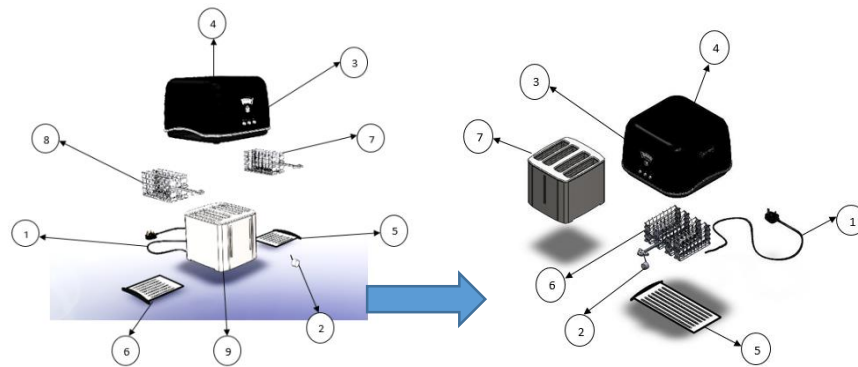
DeLonghi dual sided bread toaster exploded view before and after modification
